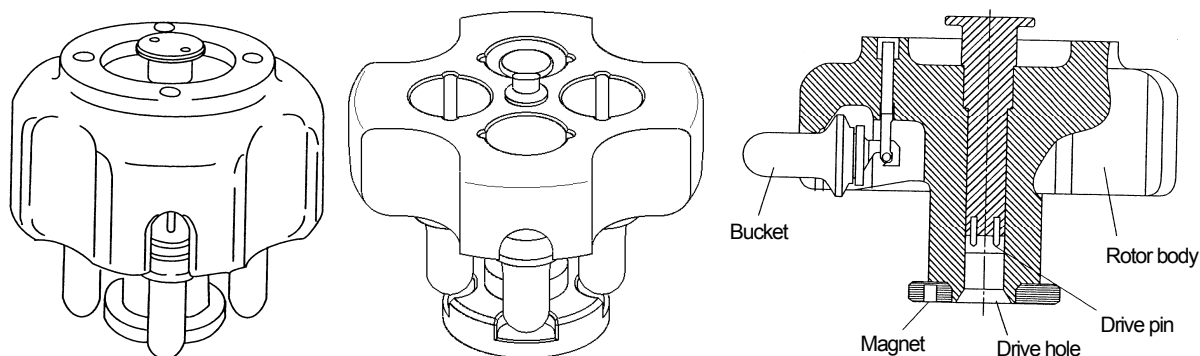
Appearance and part names of quick-setting type swing rotor
